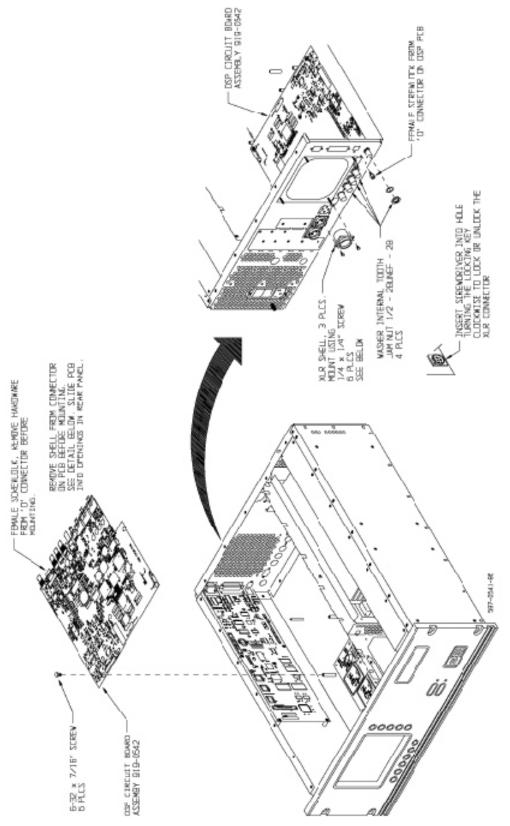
FXI DSP BOARD REMOVAL AND REINSTALLATION
